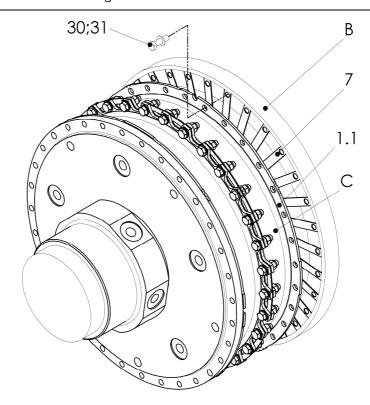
Mounting the rubber element assembly to the flywheel
